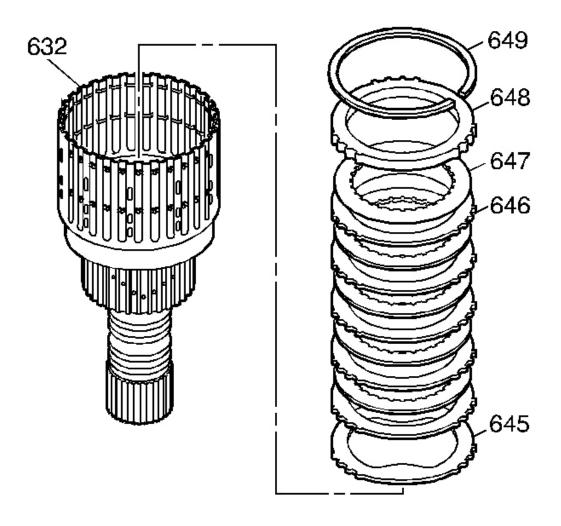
Identifying Third Clutch Plates Assemblies Courtesy of GENERAL MOTORS CORP.
